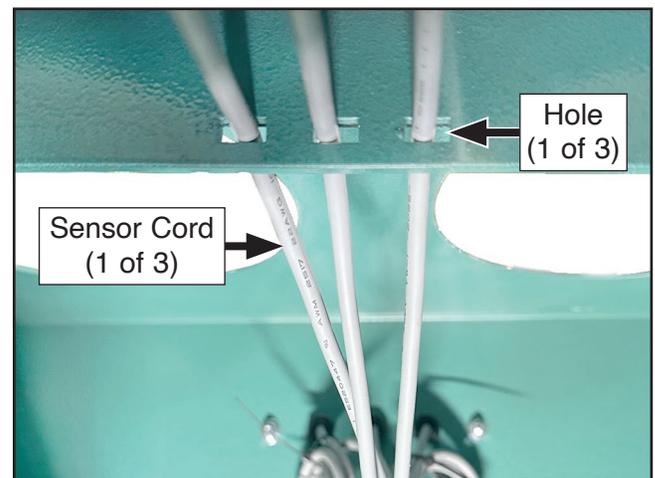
Photoelectric sensor cords routed through holes in machine body.
